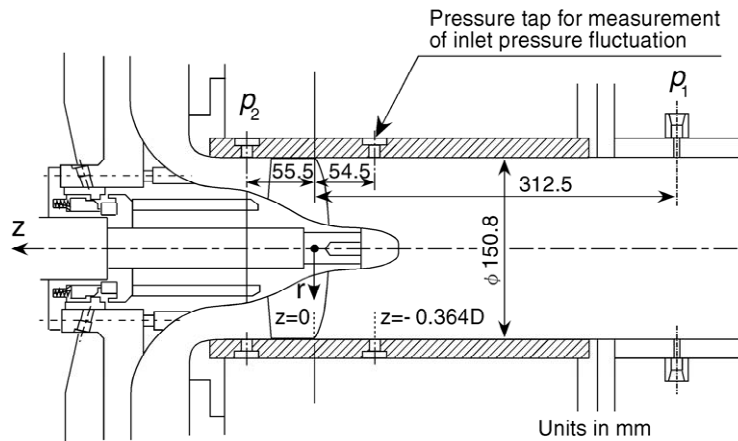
Schematic drawing of the inducer test section, showing the position of the pressure transducers.
